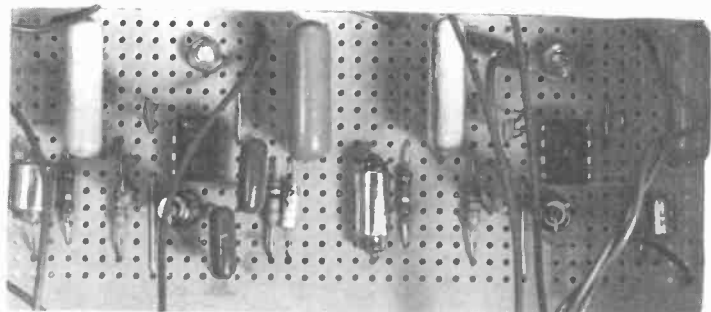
The magnetic preamplifier board. Shows the layout of the components on the topside of the board, breaks to be made in the copper strips on the underside, and flying lead connections. A connection to chassis is necessary via solder tag and board mount.
